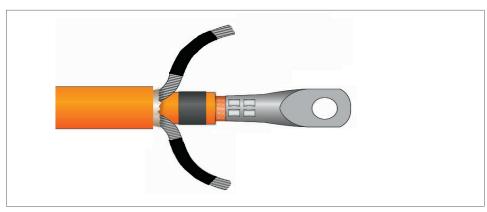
Step 6 (HV BM 1.2+S): Attaching and crimping the ring terminal
